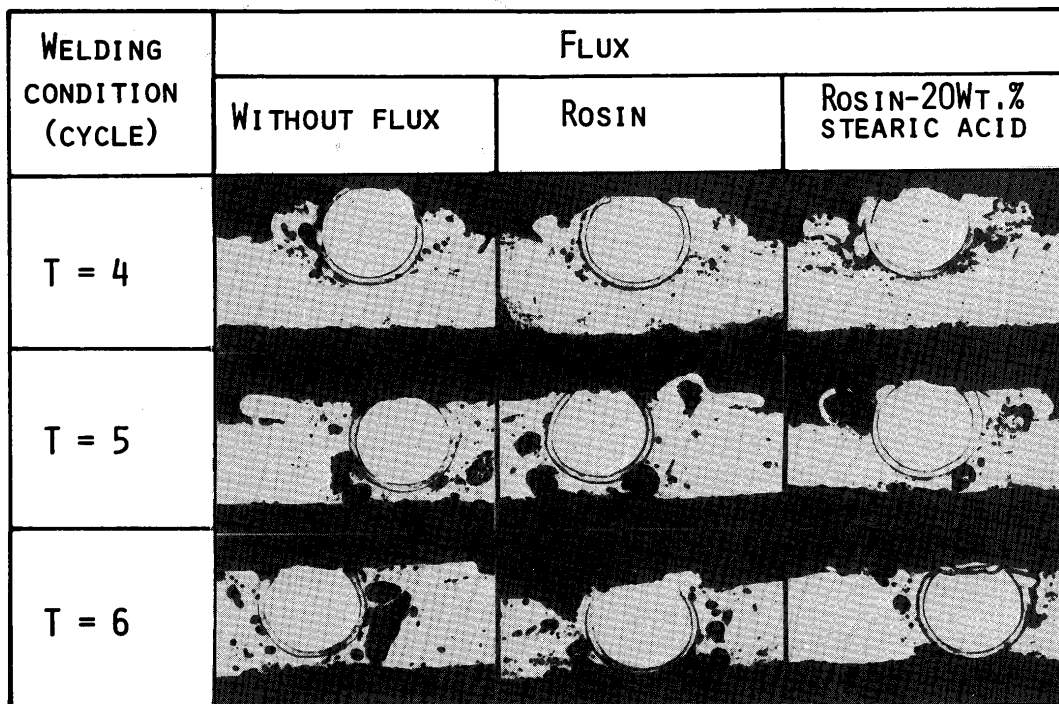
Cross sectional view of weld part used rosin system fluxes (H = 10, D = 2.4mm, P = 3.75Kg)
